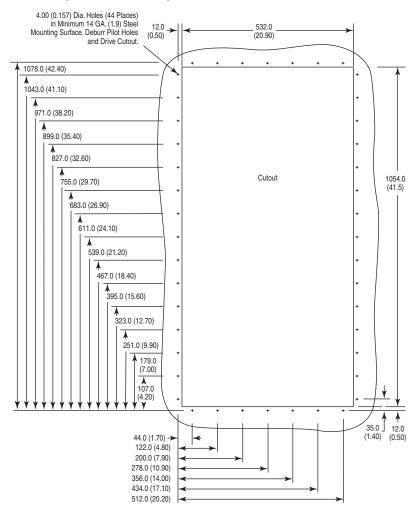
Frame 6 NEMA/UL Type 12 Flange Mount (400-690V drives only)
